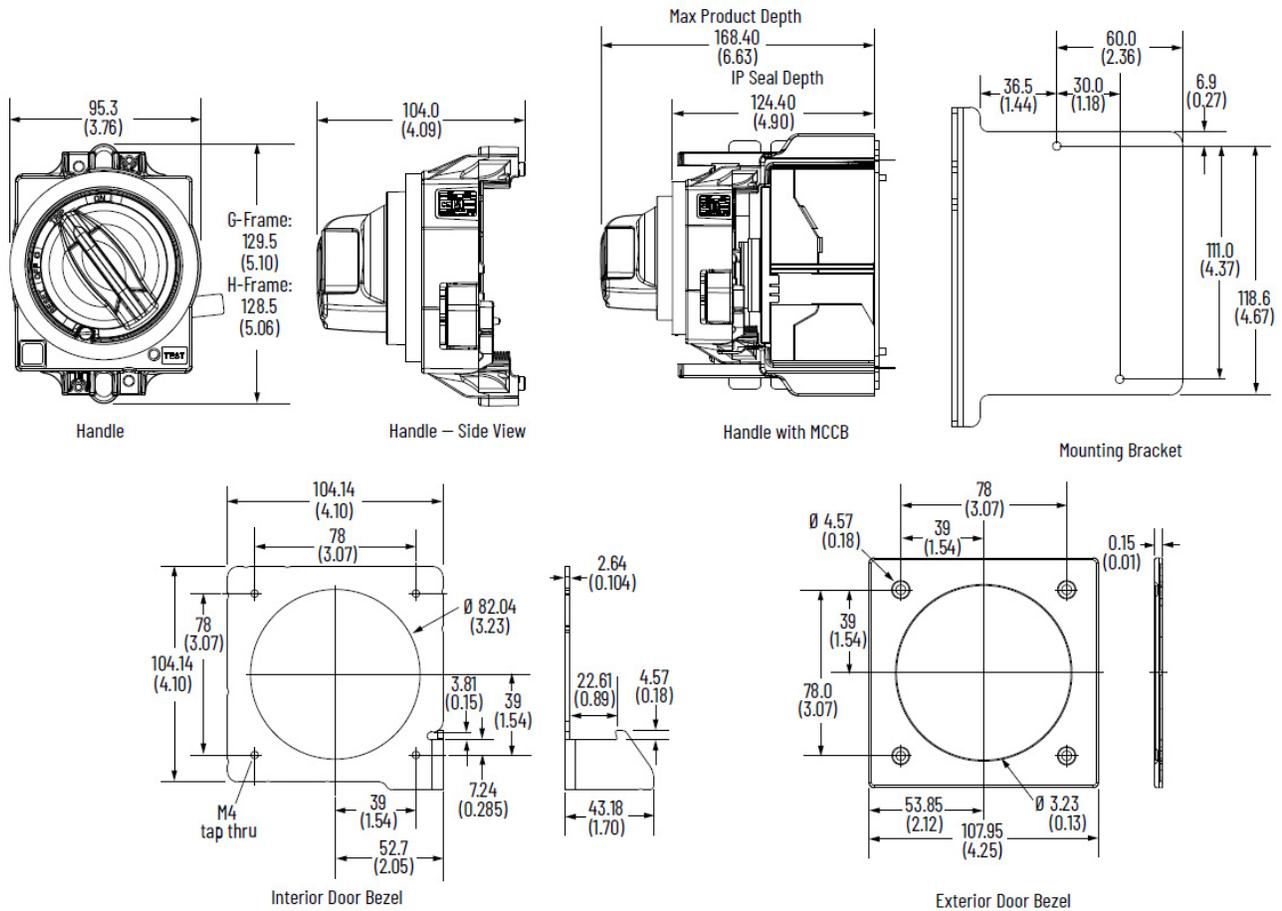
Enclosure with Handle Cutout: 1494V Variable Depth, Flange-operated Circuit Breaker Operating Mechanism
